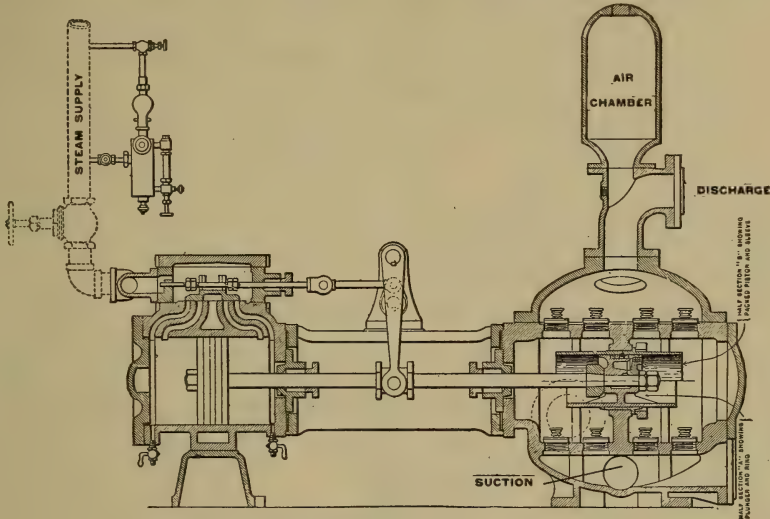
Section through a Typical Duplex Boiler-feed Pump.
